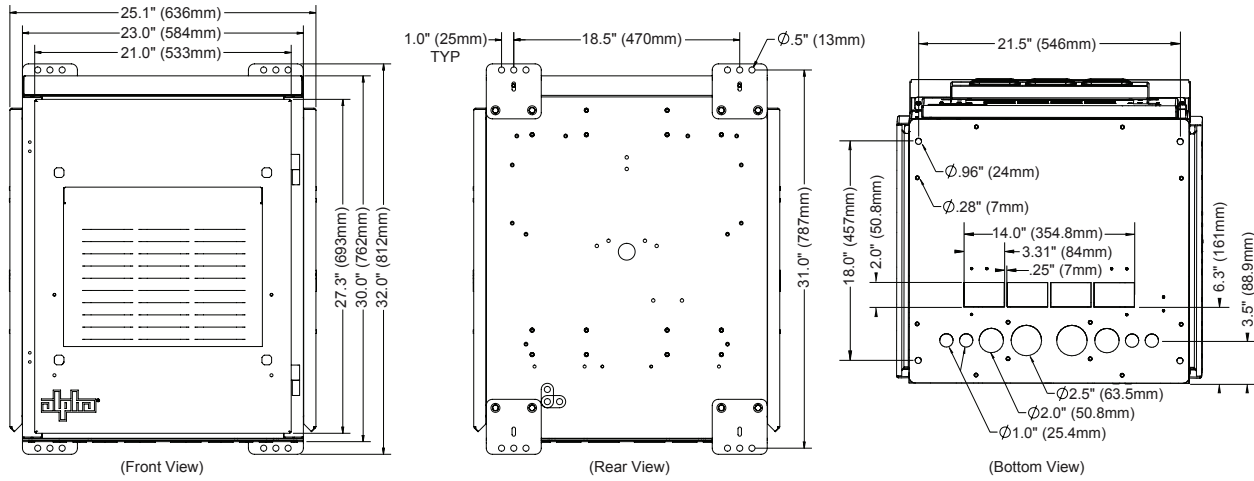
, FBE2322-ENC Base Cabinet Exterior Dimensions
